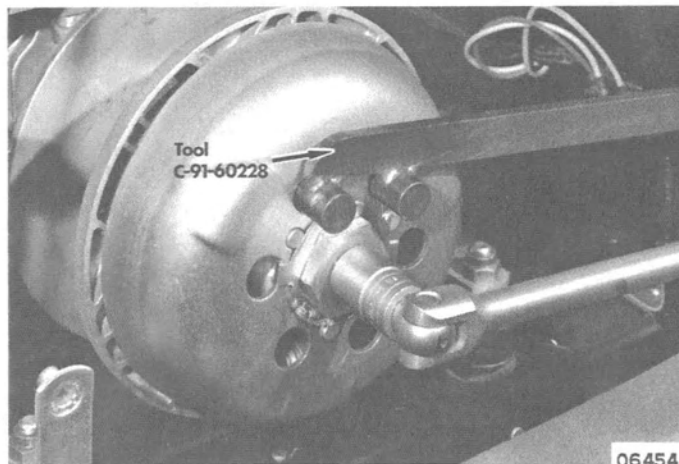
Holding Drive Sheave with C-91-60228 Tool
